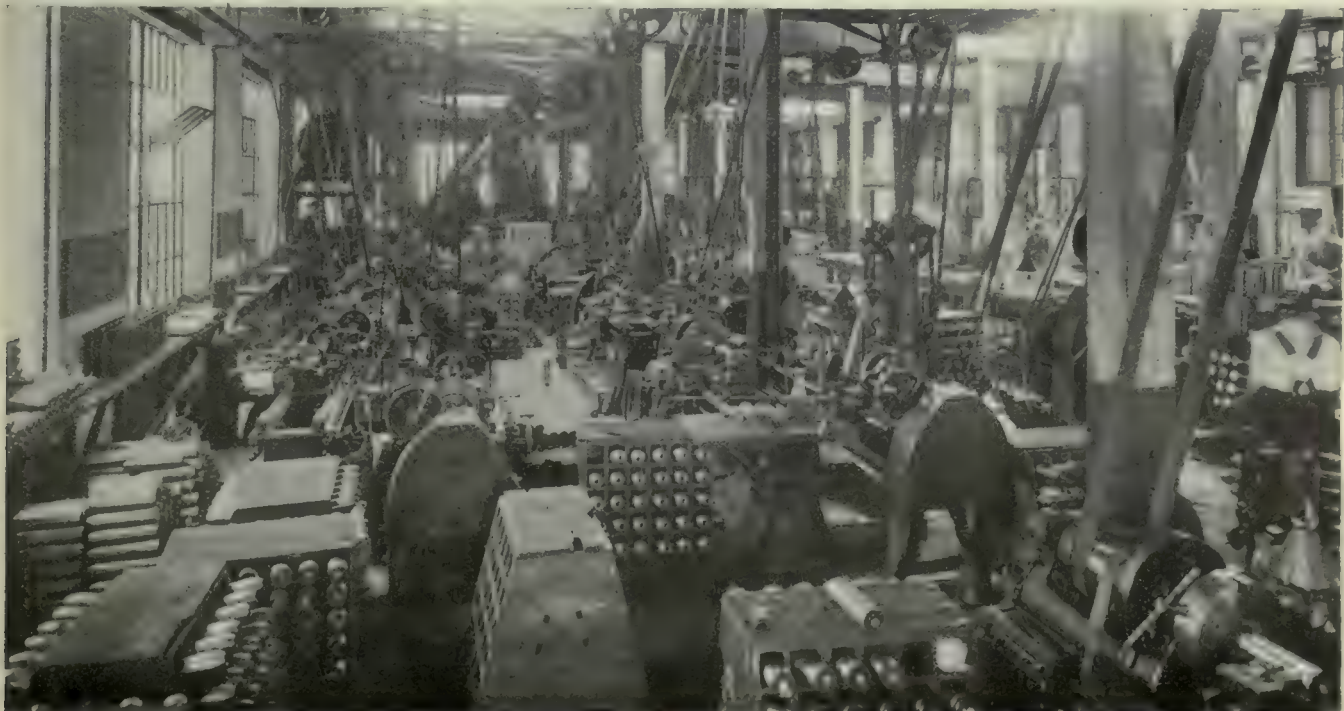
GENERAL VIEW OF MACHINE SHOP SHOWING LATHES ENGAGED ON FINISHING, GROOVING, ETC.
